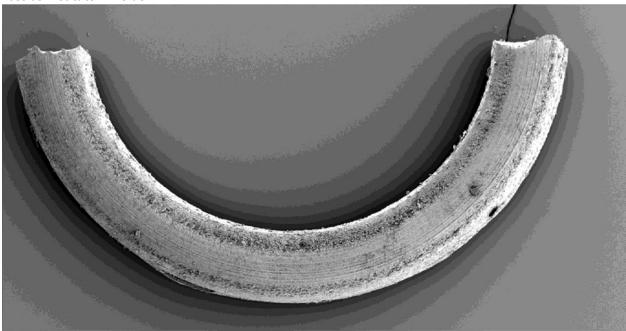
Photo of the O-ring which clearly shows that the surface of the O-ring is rough and fibrous, contains scale and was torn at the left bottom.
